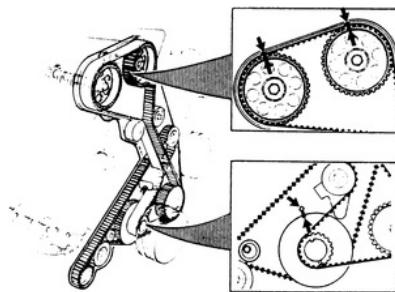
Remove the tensioner bolts in order to remove the timing belt
